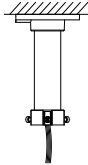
Route the Cables and Fix the Bracket on the Ceiling
